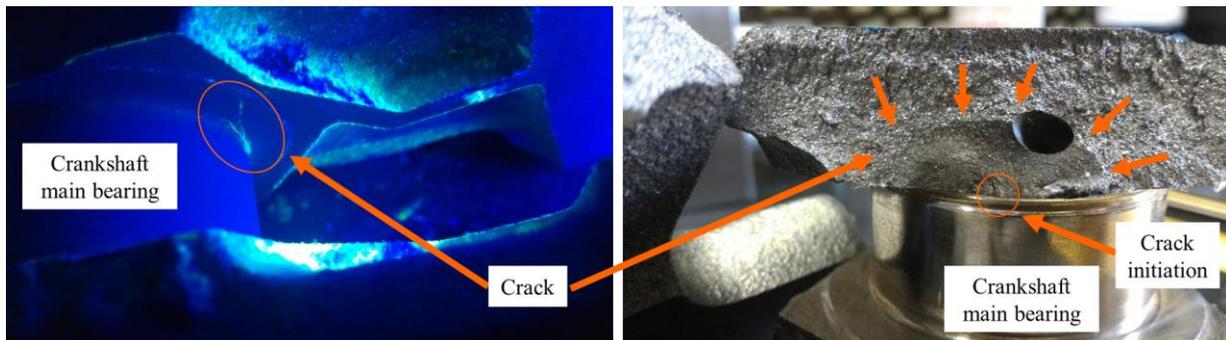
Visualization of a crack by the liquid penetrant method (left) and the analysis of the fracture with the specimen open in the crack section (right).
